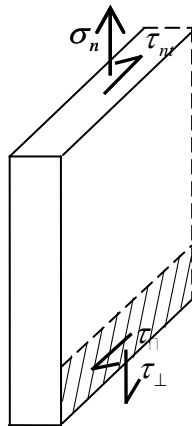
Stresses in surface between the weld and the base material.
